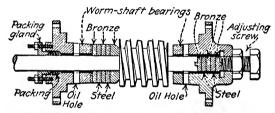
Wormshaft, showing bronze- and steel-disk thrust bearings in place.
